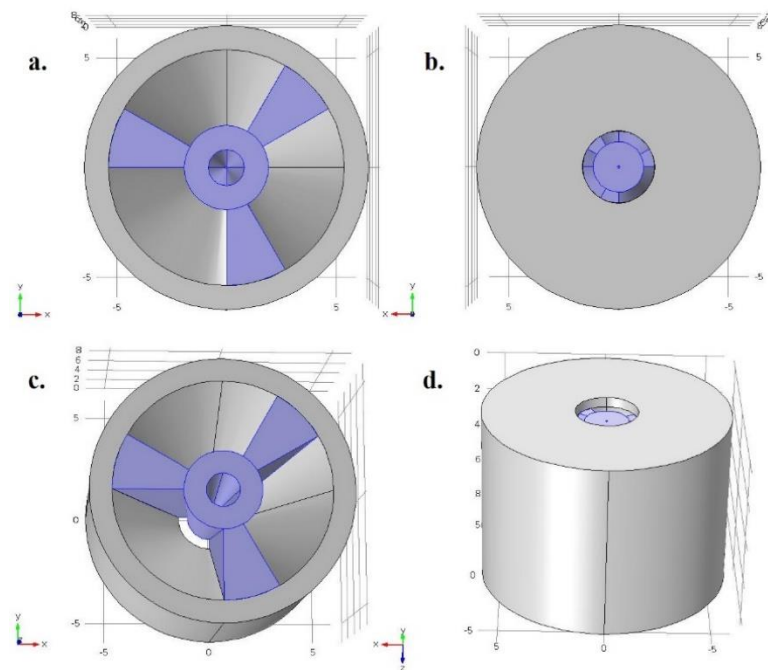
Schematic illustration of full length spinneret design prototype 1 solid views, (a. top view, b. bottom view, c. inclined top view, d. inclined bottom view)
